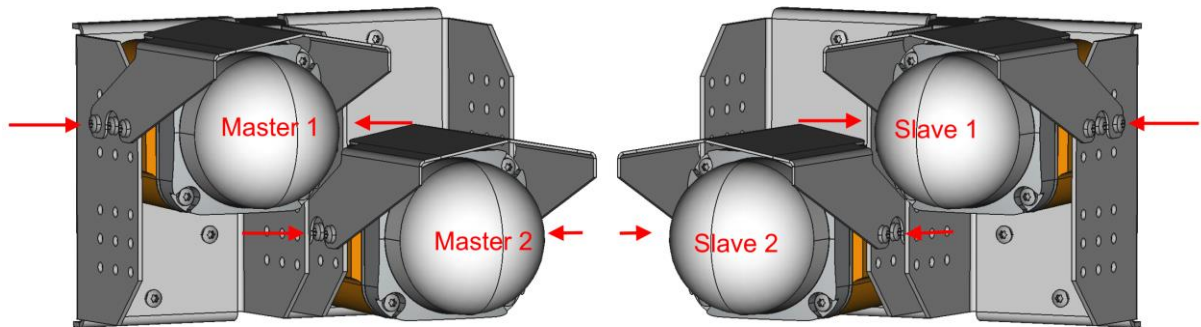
Mounting positions for mounting in the diversity mount for the master and slave side
